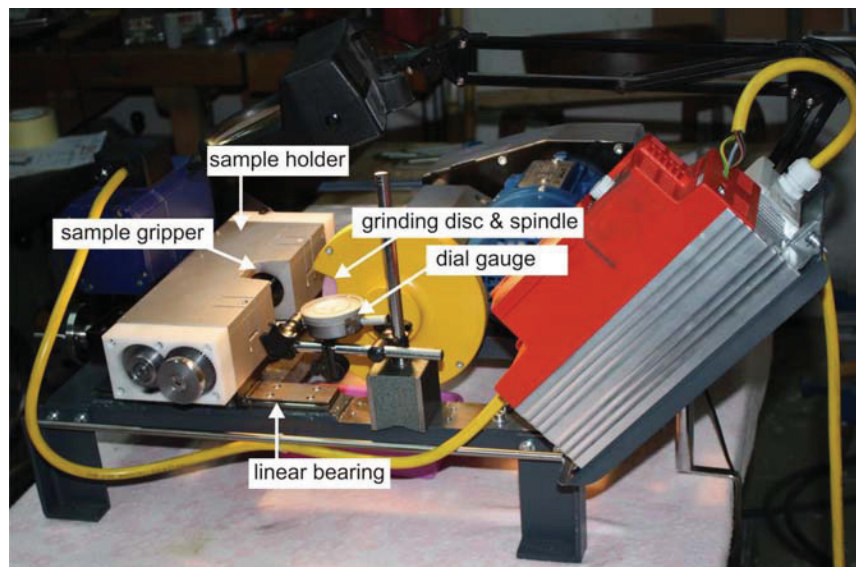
Picture of circular grinding tool which allows producing tensile samples with gauge length in the mm-regime and a diameter below 1 mm.
